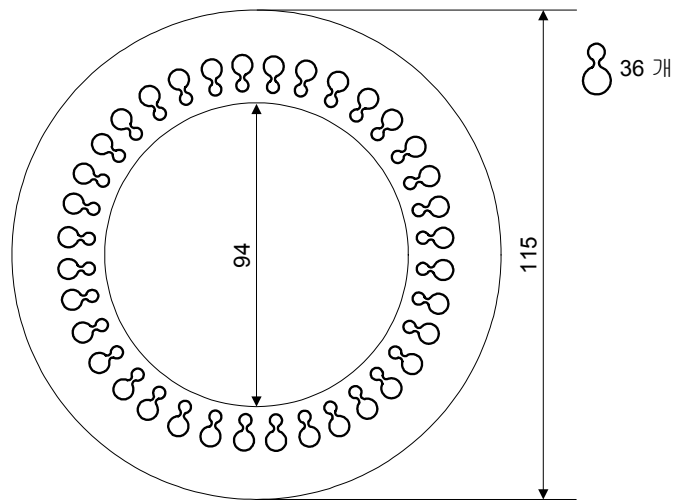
Dimension of rotor core of ○ slot type IM.
